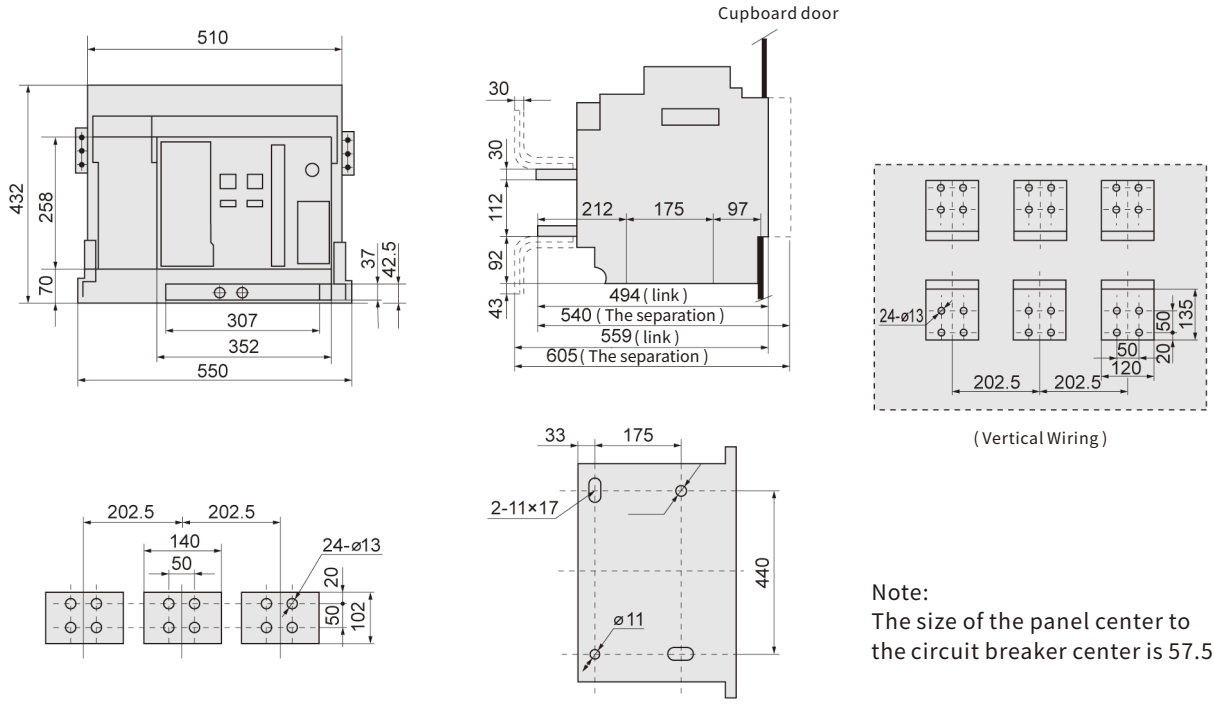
Outline and installation dimensions of drawout type circuit breaker (EKA1-3200, 3200/4)
